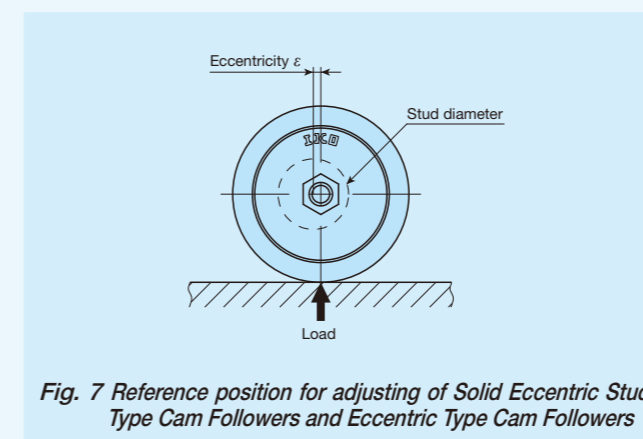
Reference position for adjusting of Solid Eccentric Stud Type Cam Followers and Eccentric Type Cam Followers
